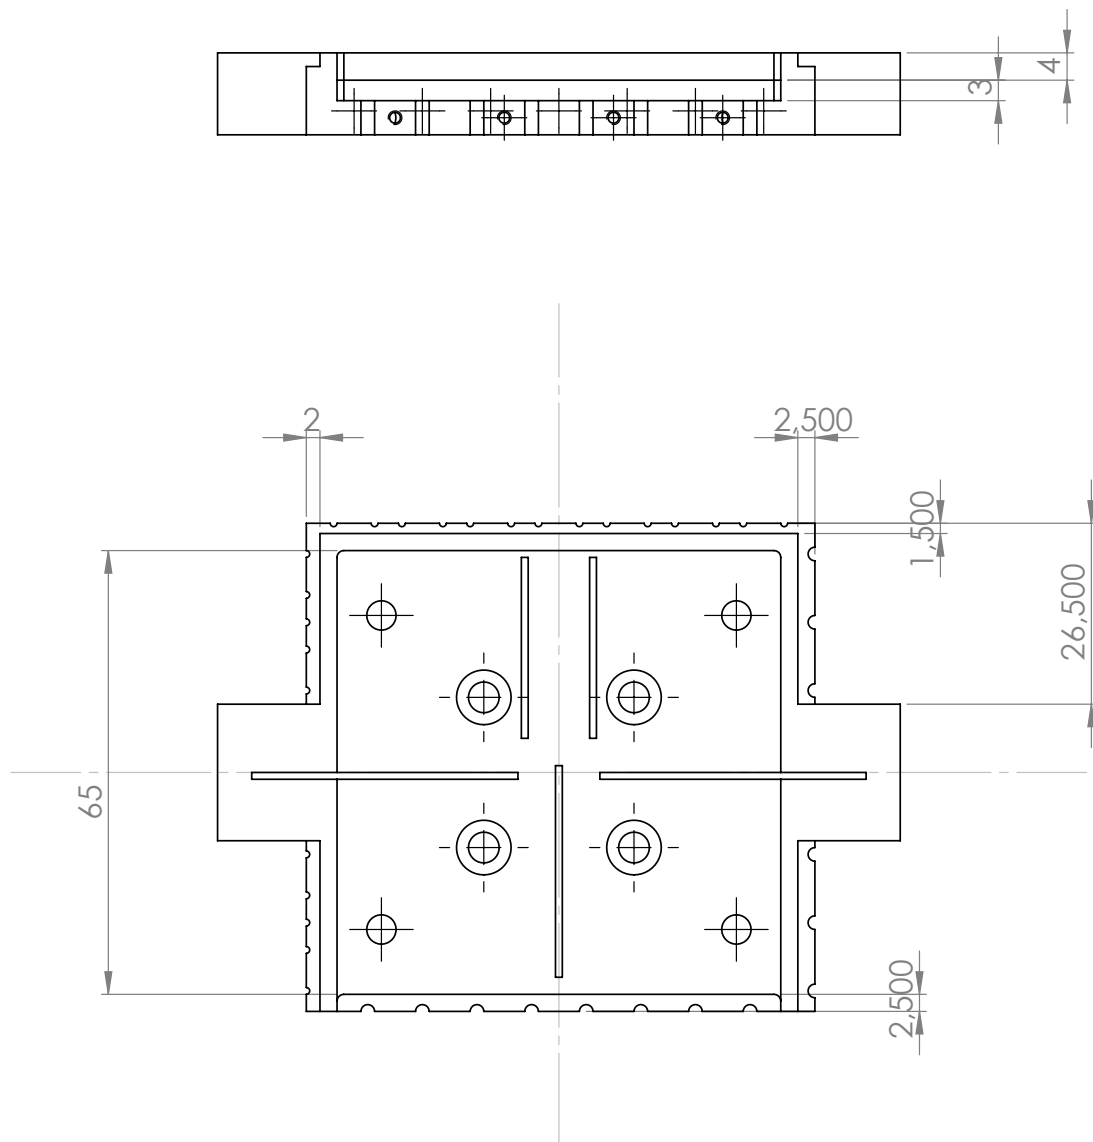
Technical drawing of the central piece, the copper block (Sheet 2 of 3).
